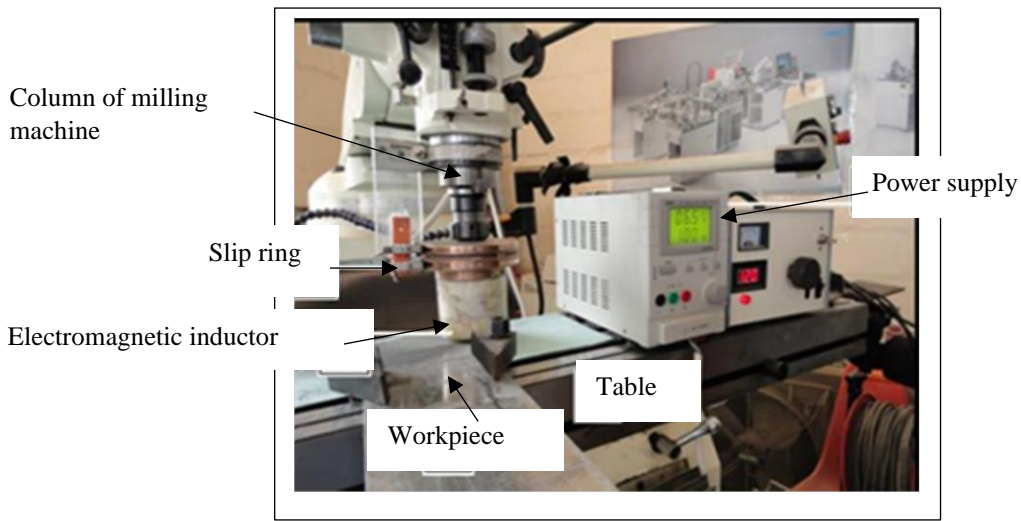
Magnetic abrasive finishing setup for the flat workpiece surface (Kadhun *et al.* 2015).
